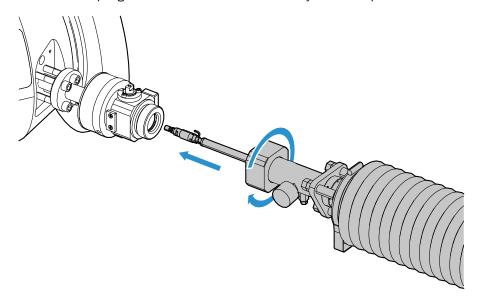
Mounting the spindle assembly and the rod to the ball valve assembly
